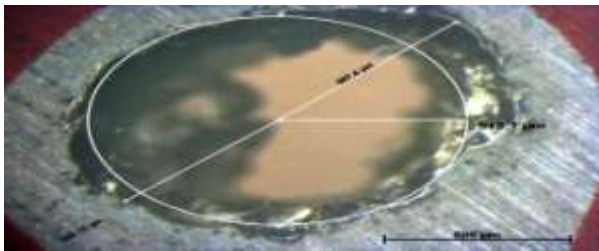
(a) Top side of micro hole using 0.9 mm copper tool
